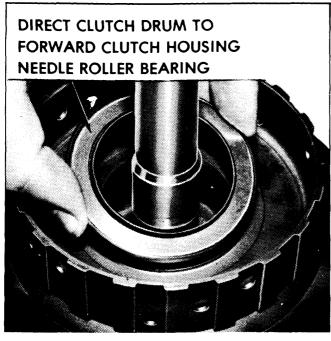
Direct Clutch Drum to Forward Clutch Housing Needle Roller Bearings
